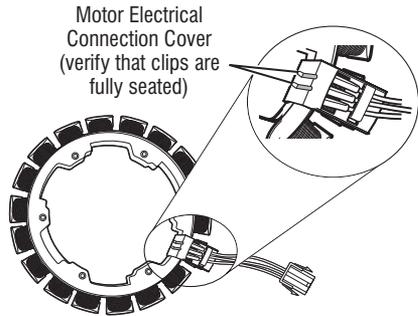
Removing Shifter Coil and Checking Motor Electrical Connection
